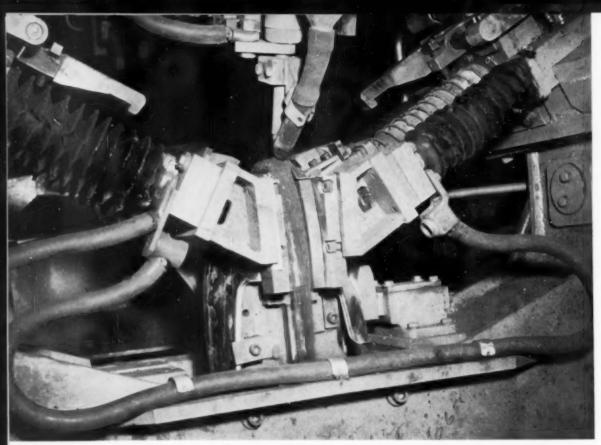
Completing the automatic are weld on the nose of a bumper guard clamped in a rocking fixture. Flux from the welding head covers the arc.
